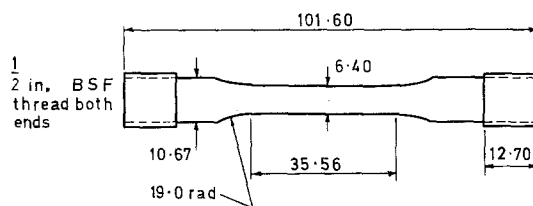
Dimensions of round bar creep tests piece (mm) used with equivalent gauge length extensometer.
